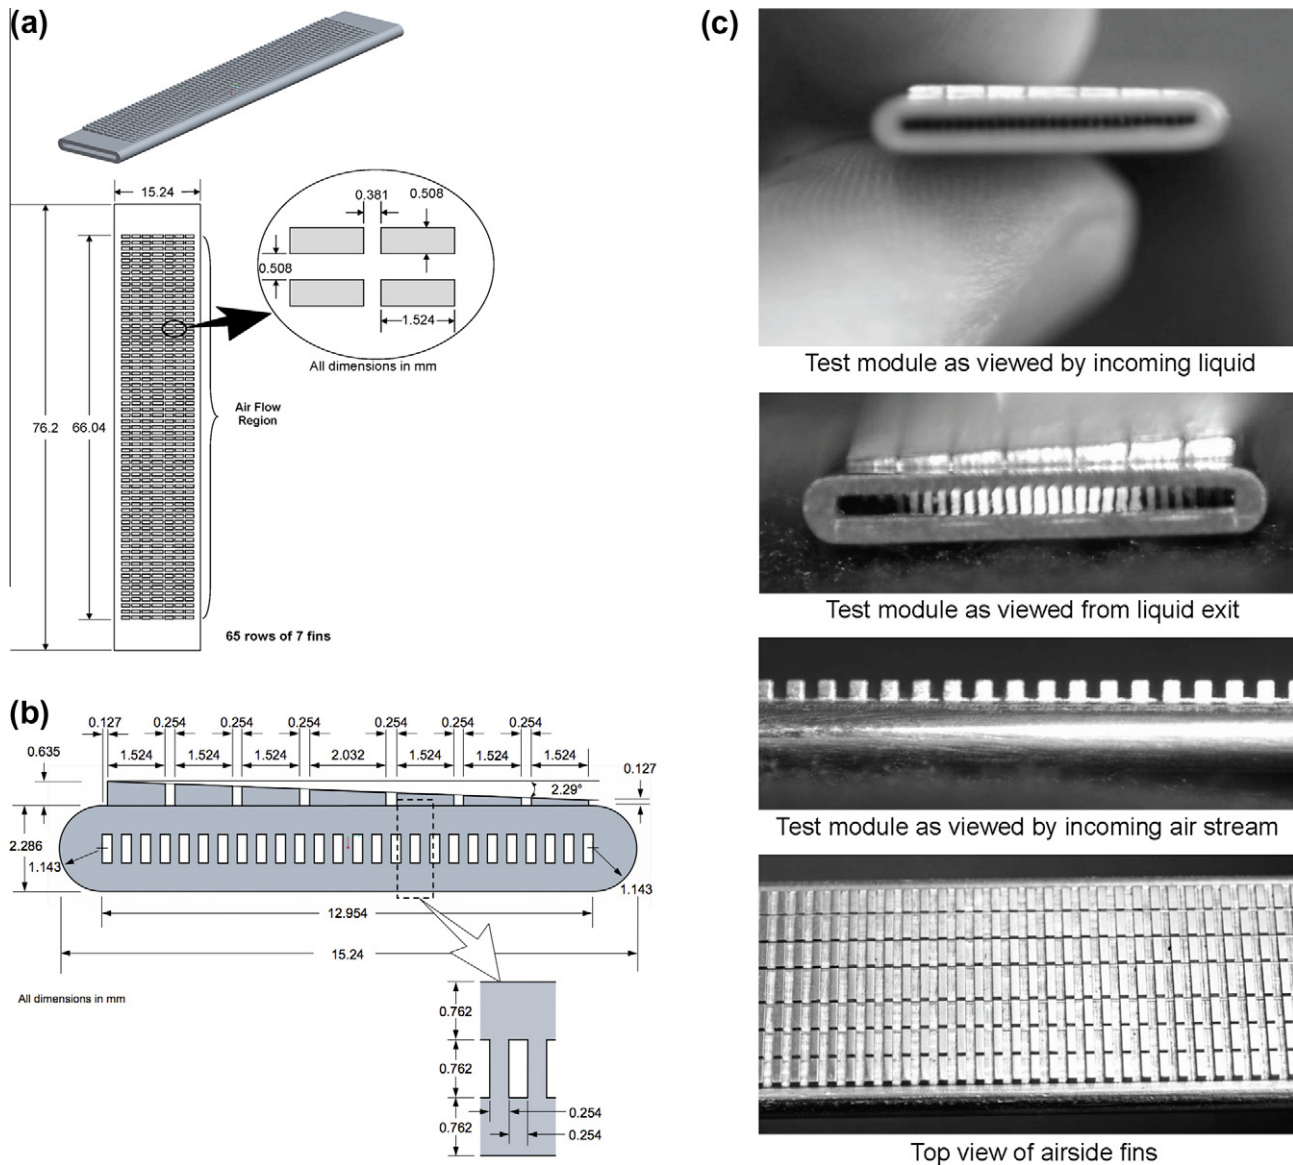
Test module (a) airside geometry and (b) fuel-side and airside geometries. (c) Various views of test module.
